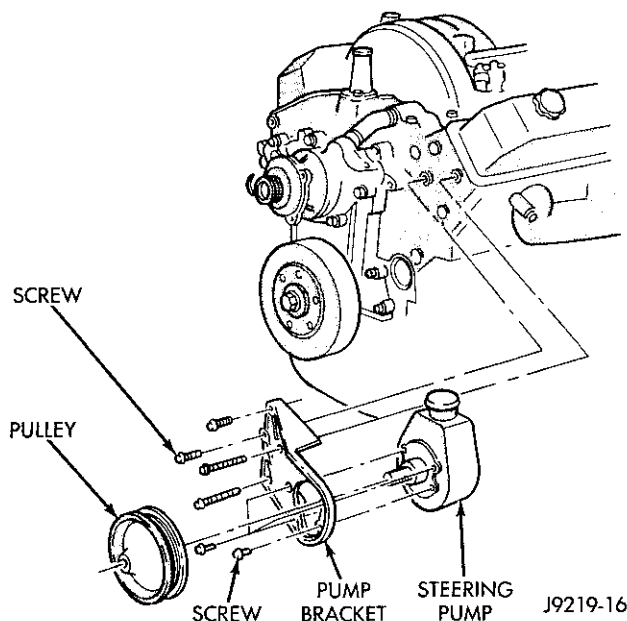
Pump Mounting 3.9L, 5.2L and 5.9L
